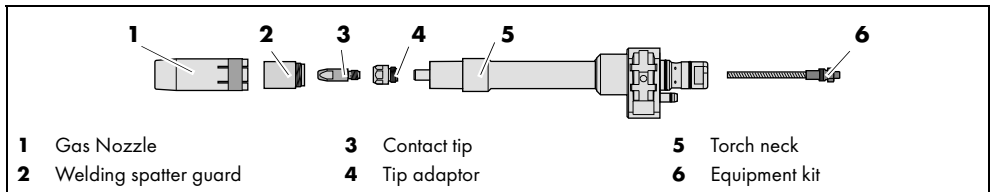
Equipping the ROBO WH 241D and ROBO WH 455D torch neck
